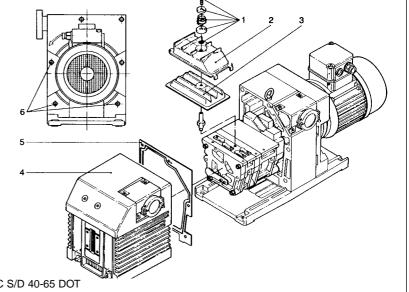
Removal and fitting of the internal demister TRIVAC S/D 40-65 DOT
